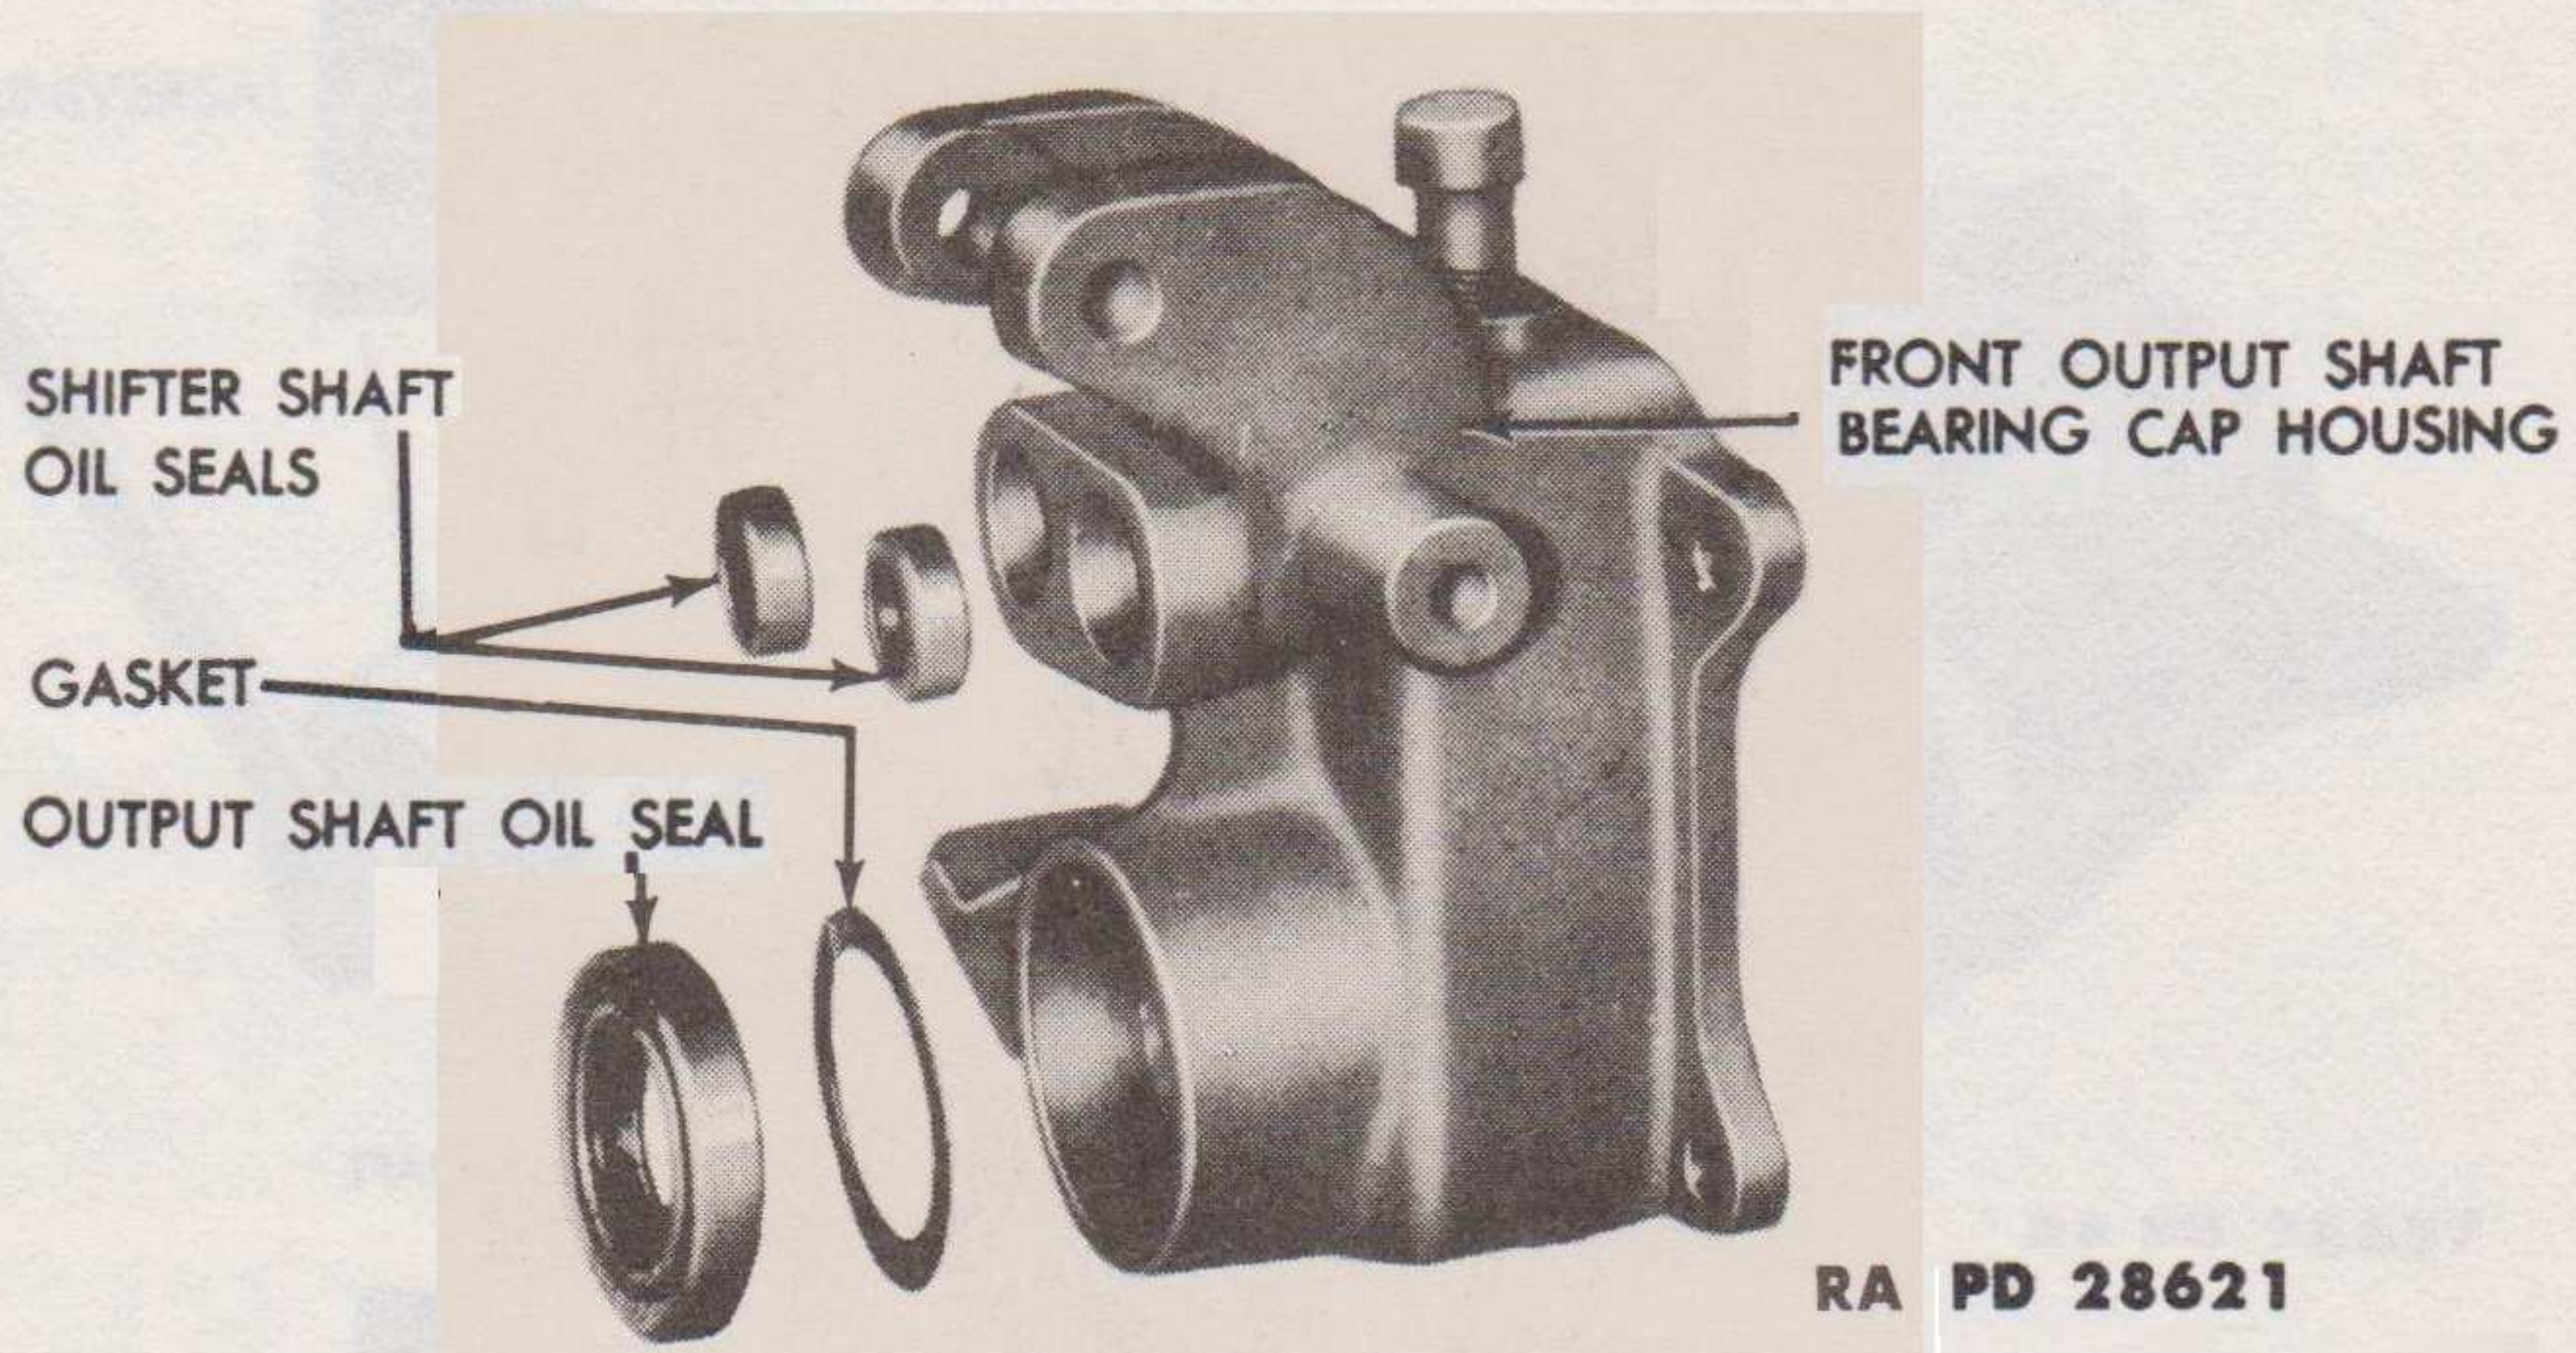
Front Output Shaft Bearing Cap Housing and Oil Seals
